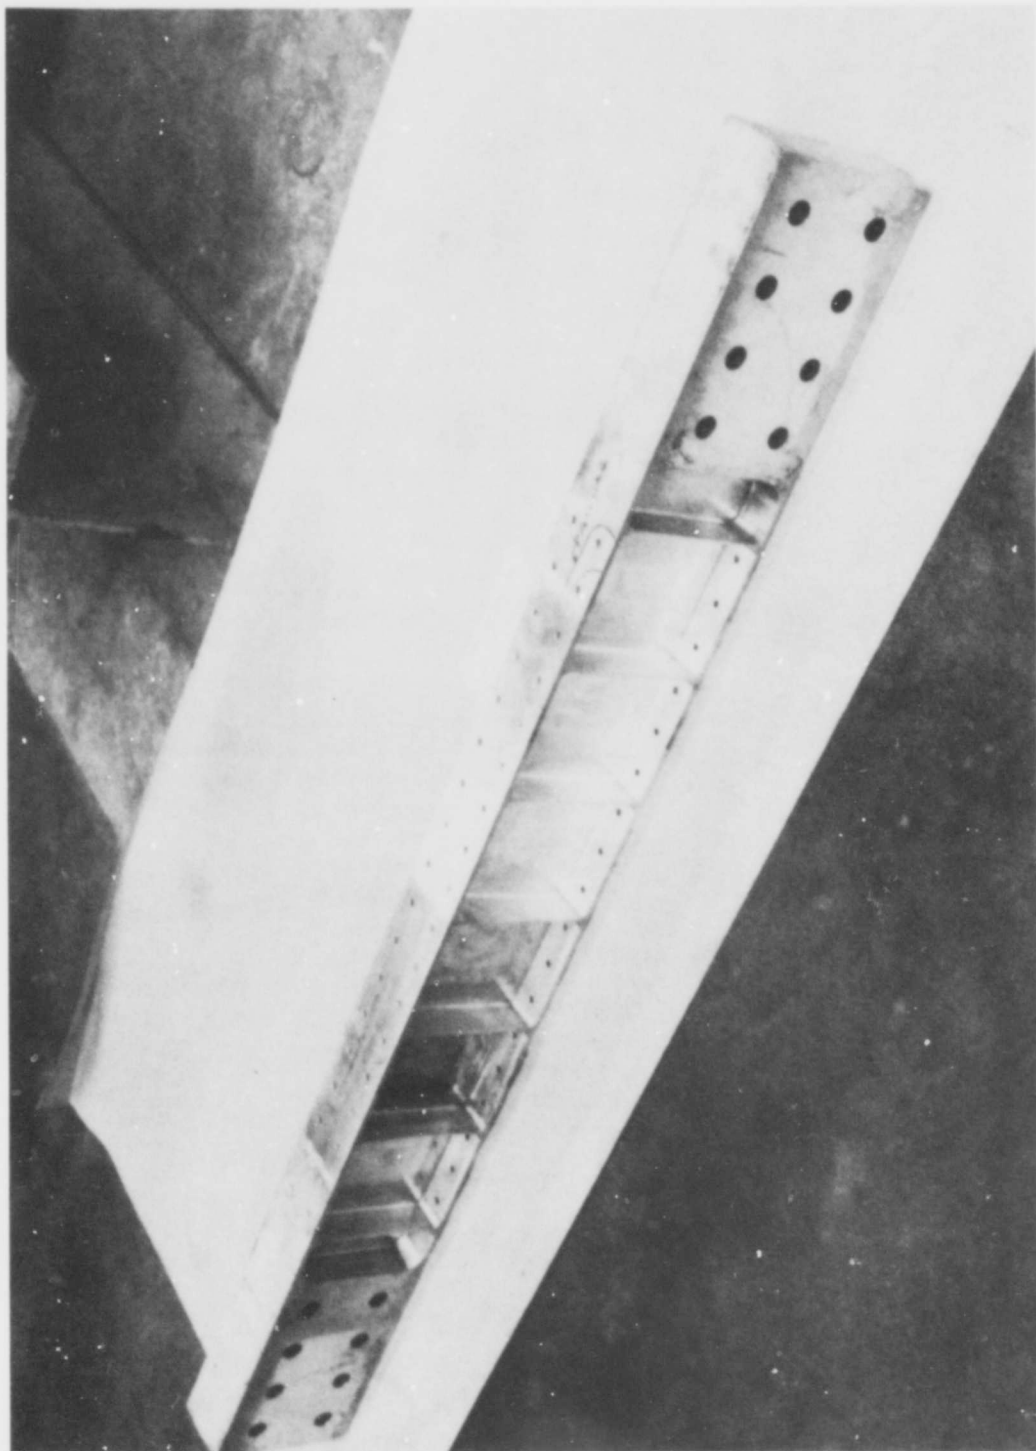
ALUMINUM I-BEAM FAILURE, WITH FASTENER HOLES, S/N F409763
